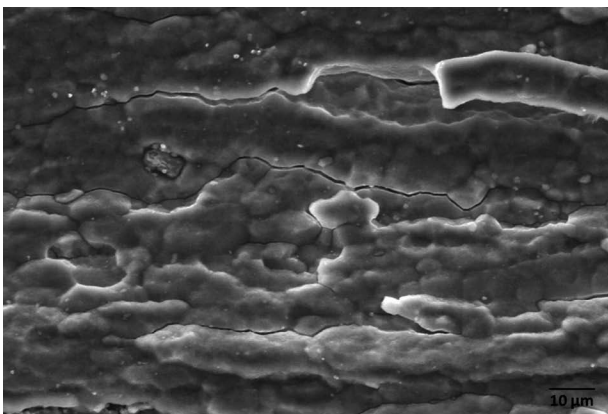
High magnified image of fracture surface shown in Fig. 220
